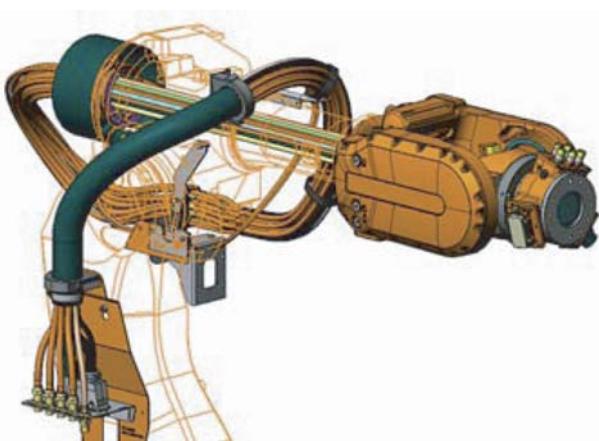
DressPack upper arm, integrated. Material Handling and Spot Welding (option 778-2 (778-1), option 798-2 and option 780-1).
